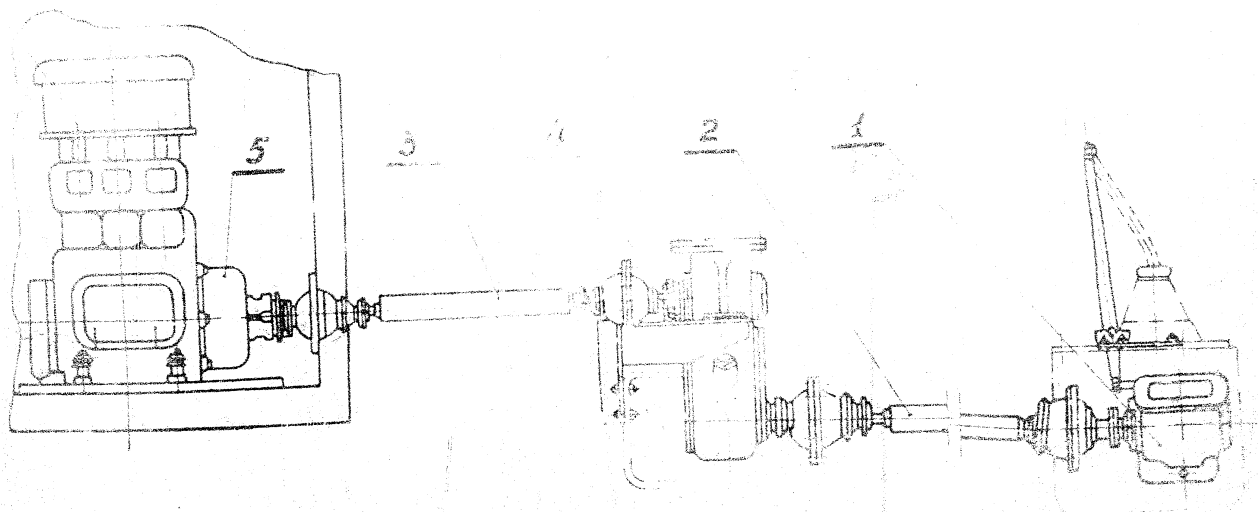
Diagram of the dislocation of the main parts of the drive: 1 - gear box; 2 - forward cardan drive; 3 - rear cardan drive; 4 - reducing gear.
